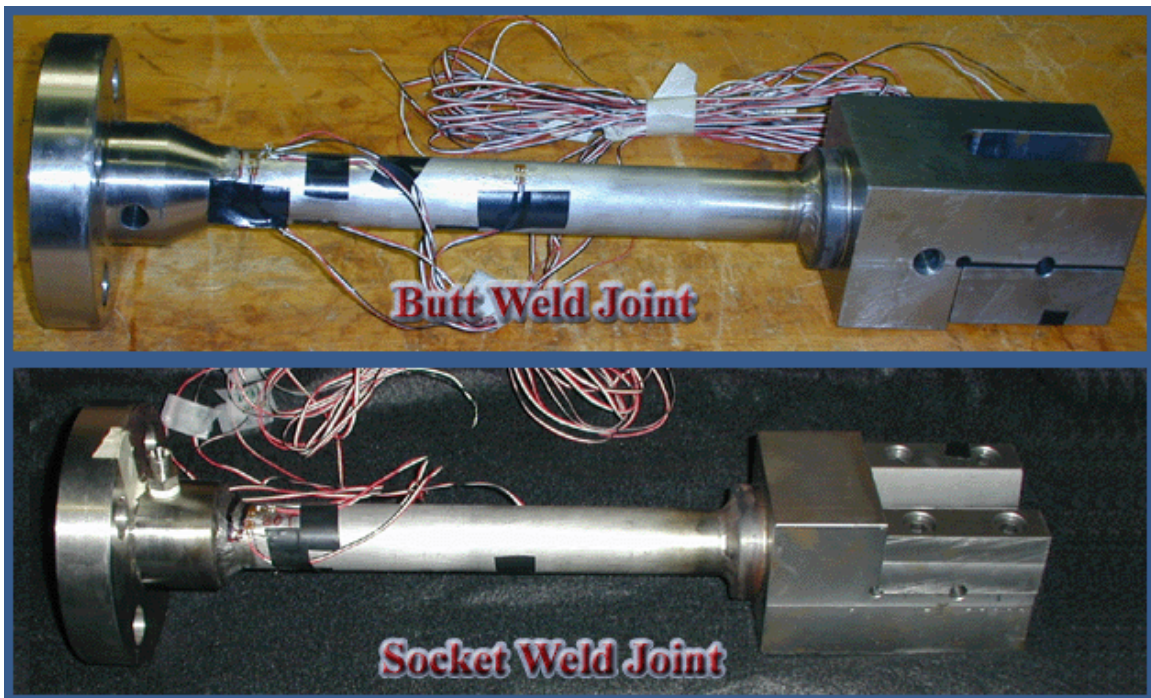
Butt- and socket-welded specimens (Lu [2003])
